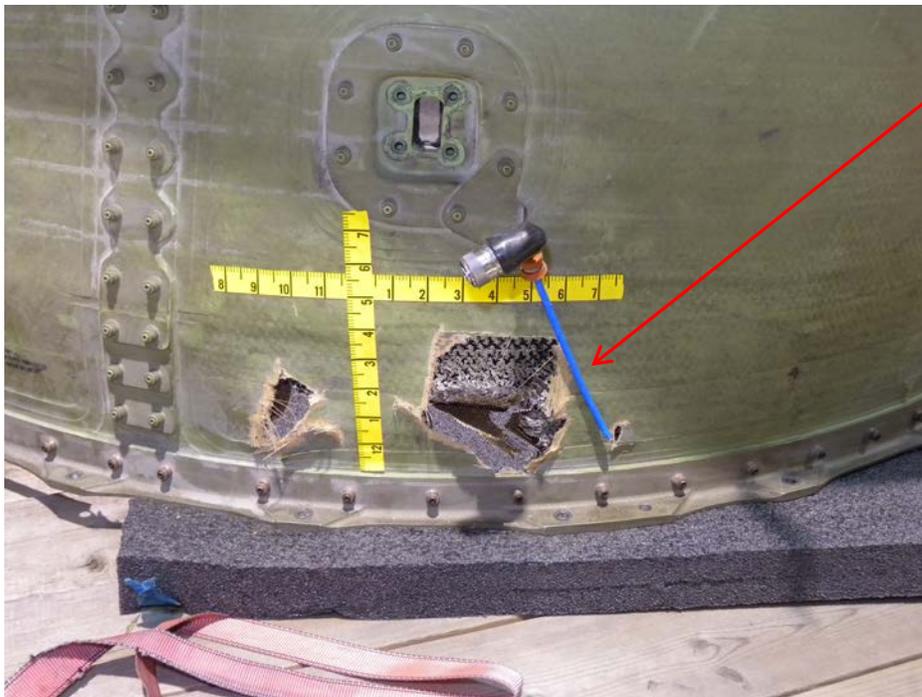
Inlet Inner Barrel Face Sheet - Forward of A-Flange
